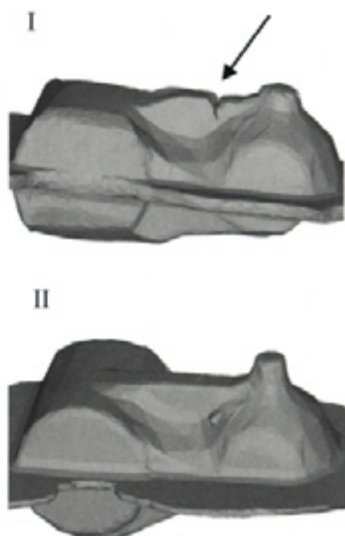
A forging with overlapping (case I) and a forging without any defect (case II)
